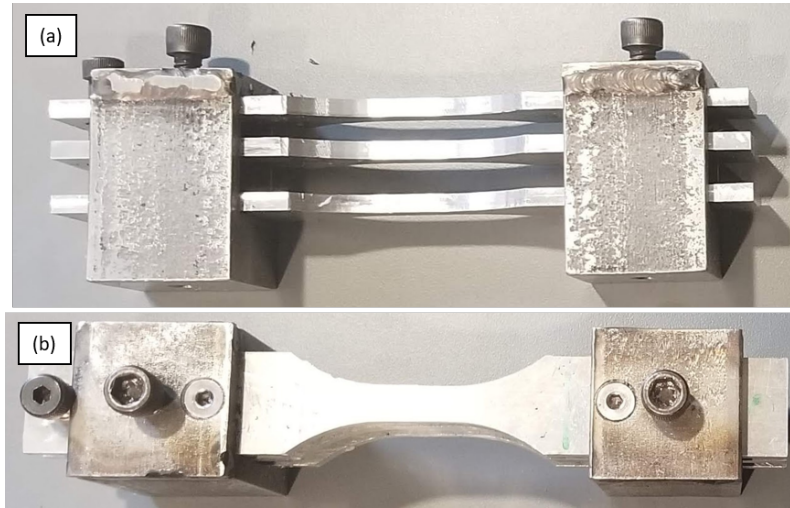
(a) Side view of router fixture. (b) Top view of router fixture.
